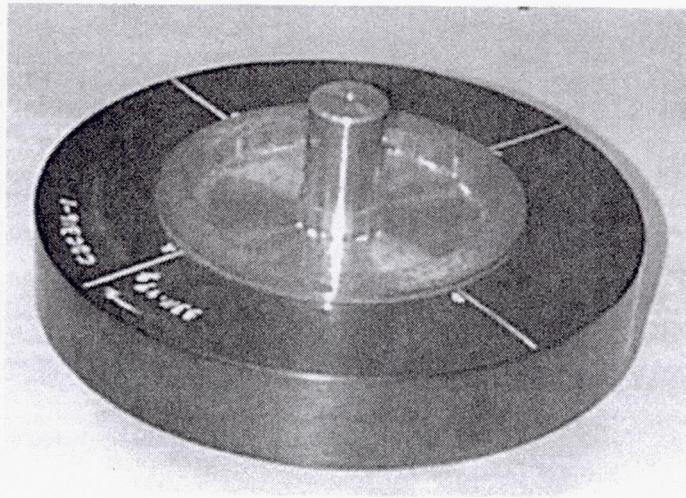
Pancake rotor assembly A with aluminum hub.
